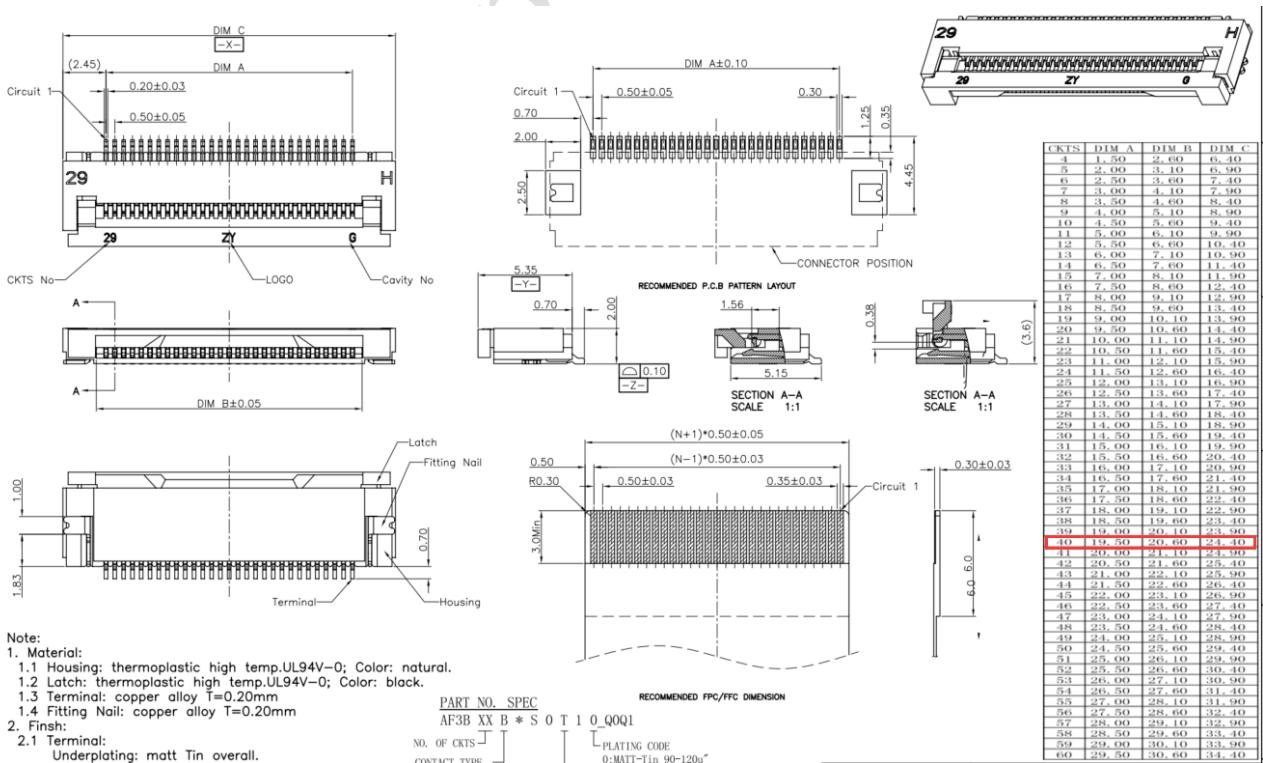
Flip and 0.5mm Pitch and 40 PIN FPC PCB Package
